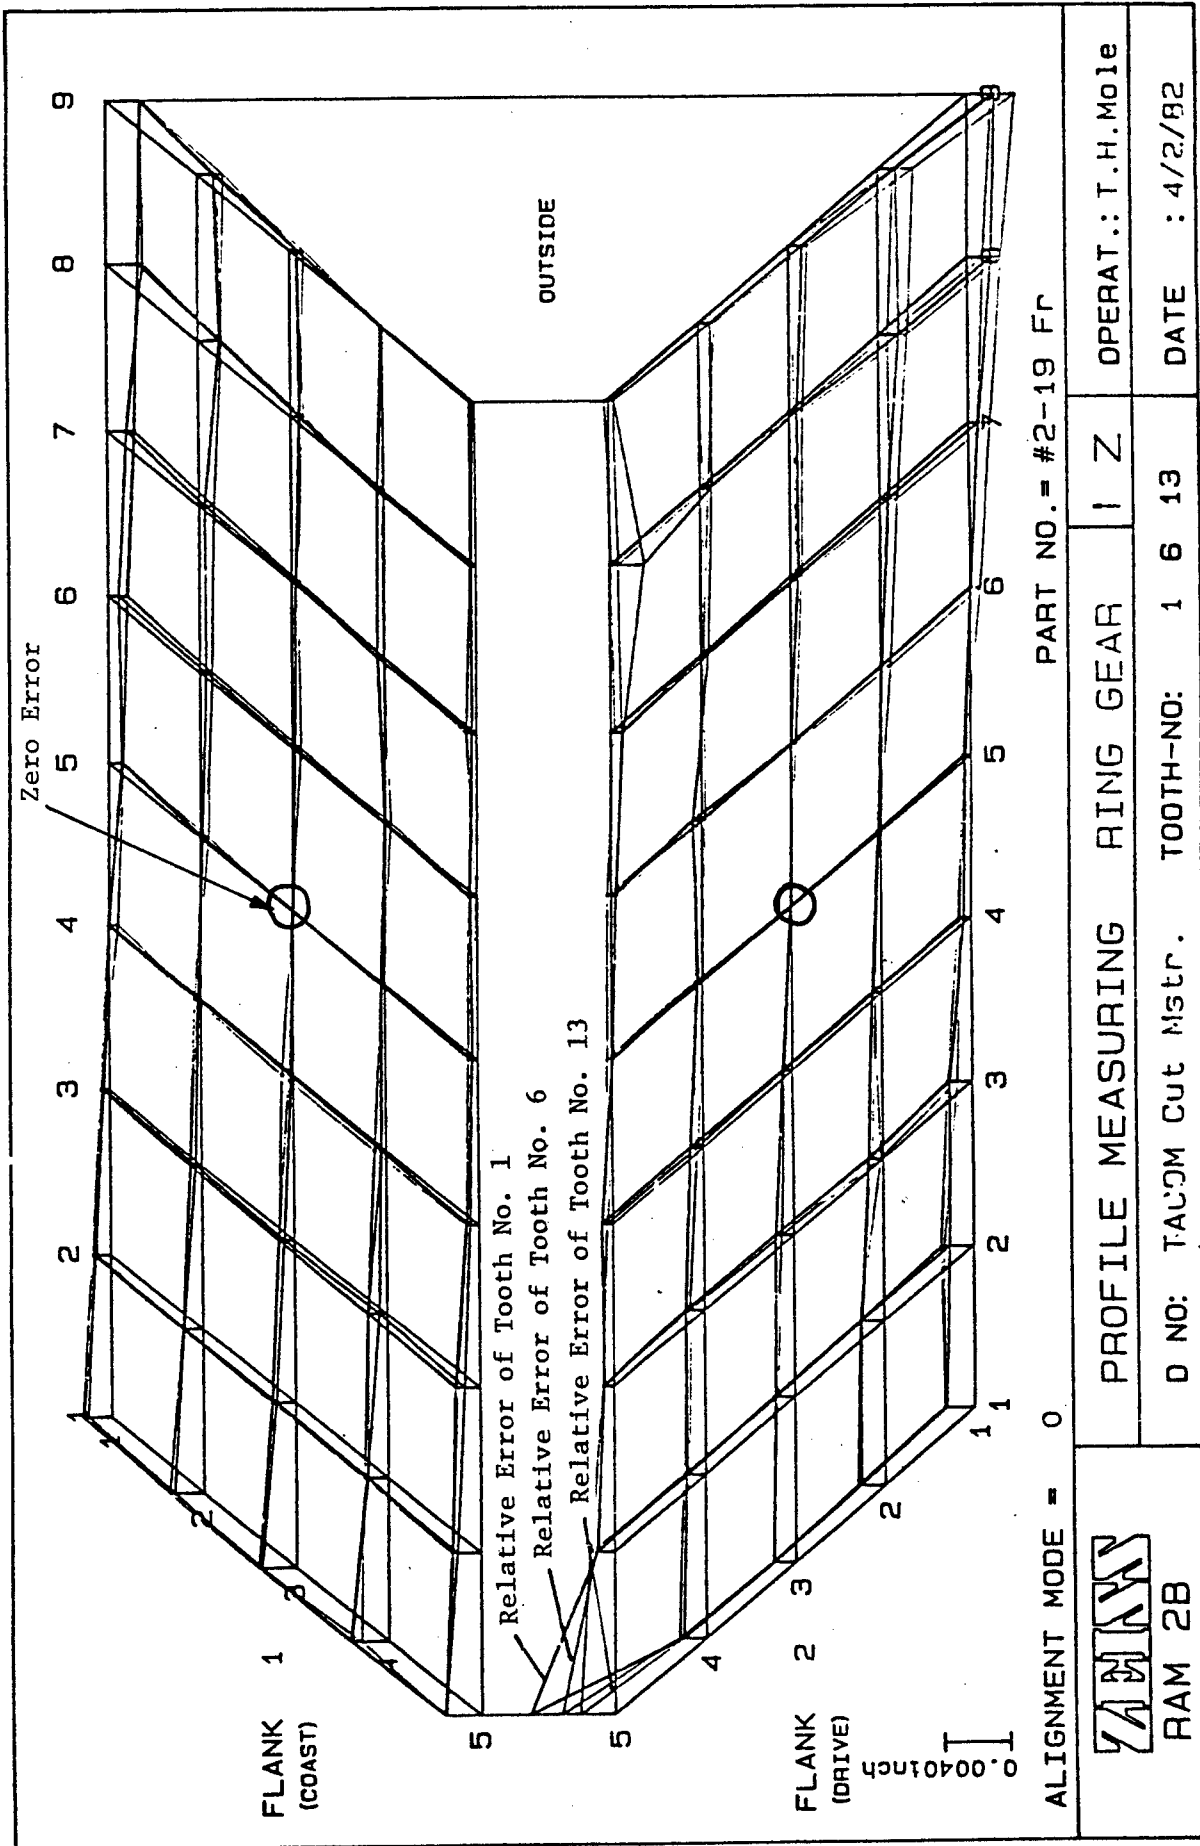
Zeiss Gear Tooth Plots, Graphically Illustrating the Tooth Form Variation of Forged Gears Versus the Cut Master Gear
